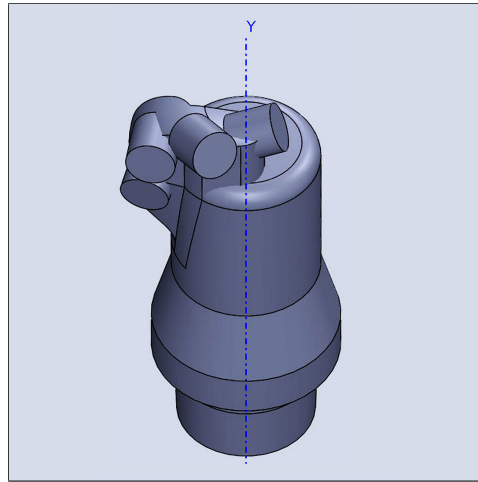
3D model of placeholder cylinders representing cutter sockets on the blade.
